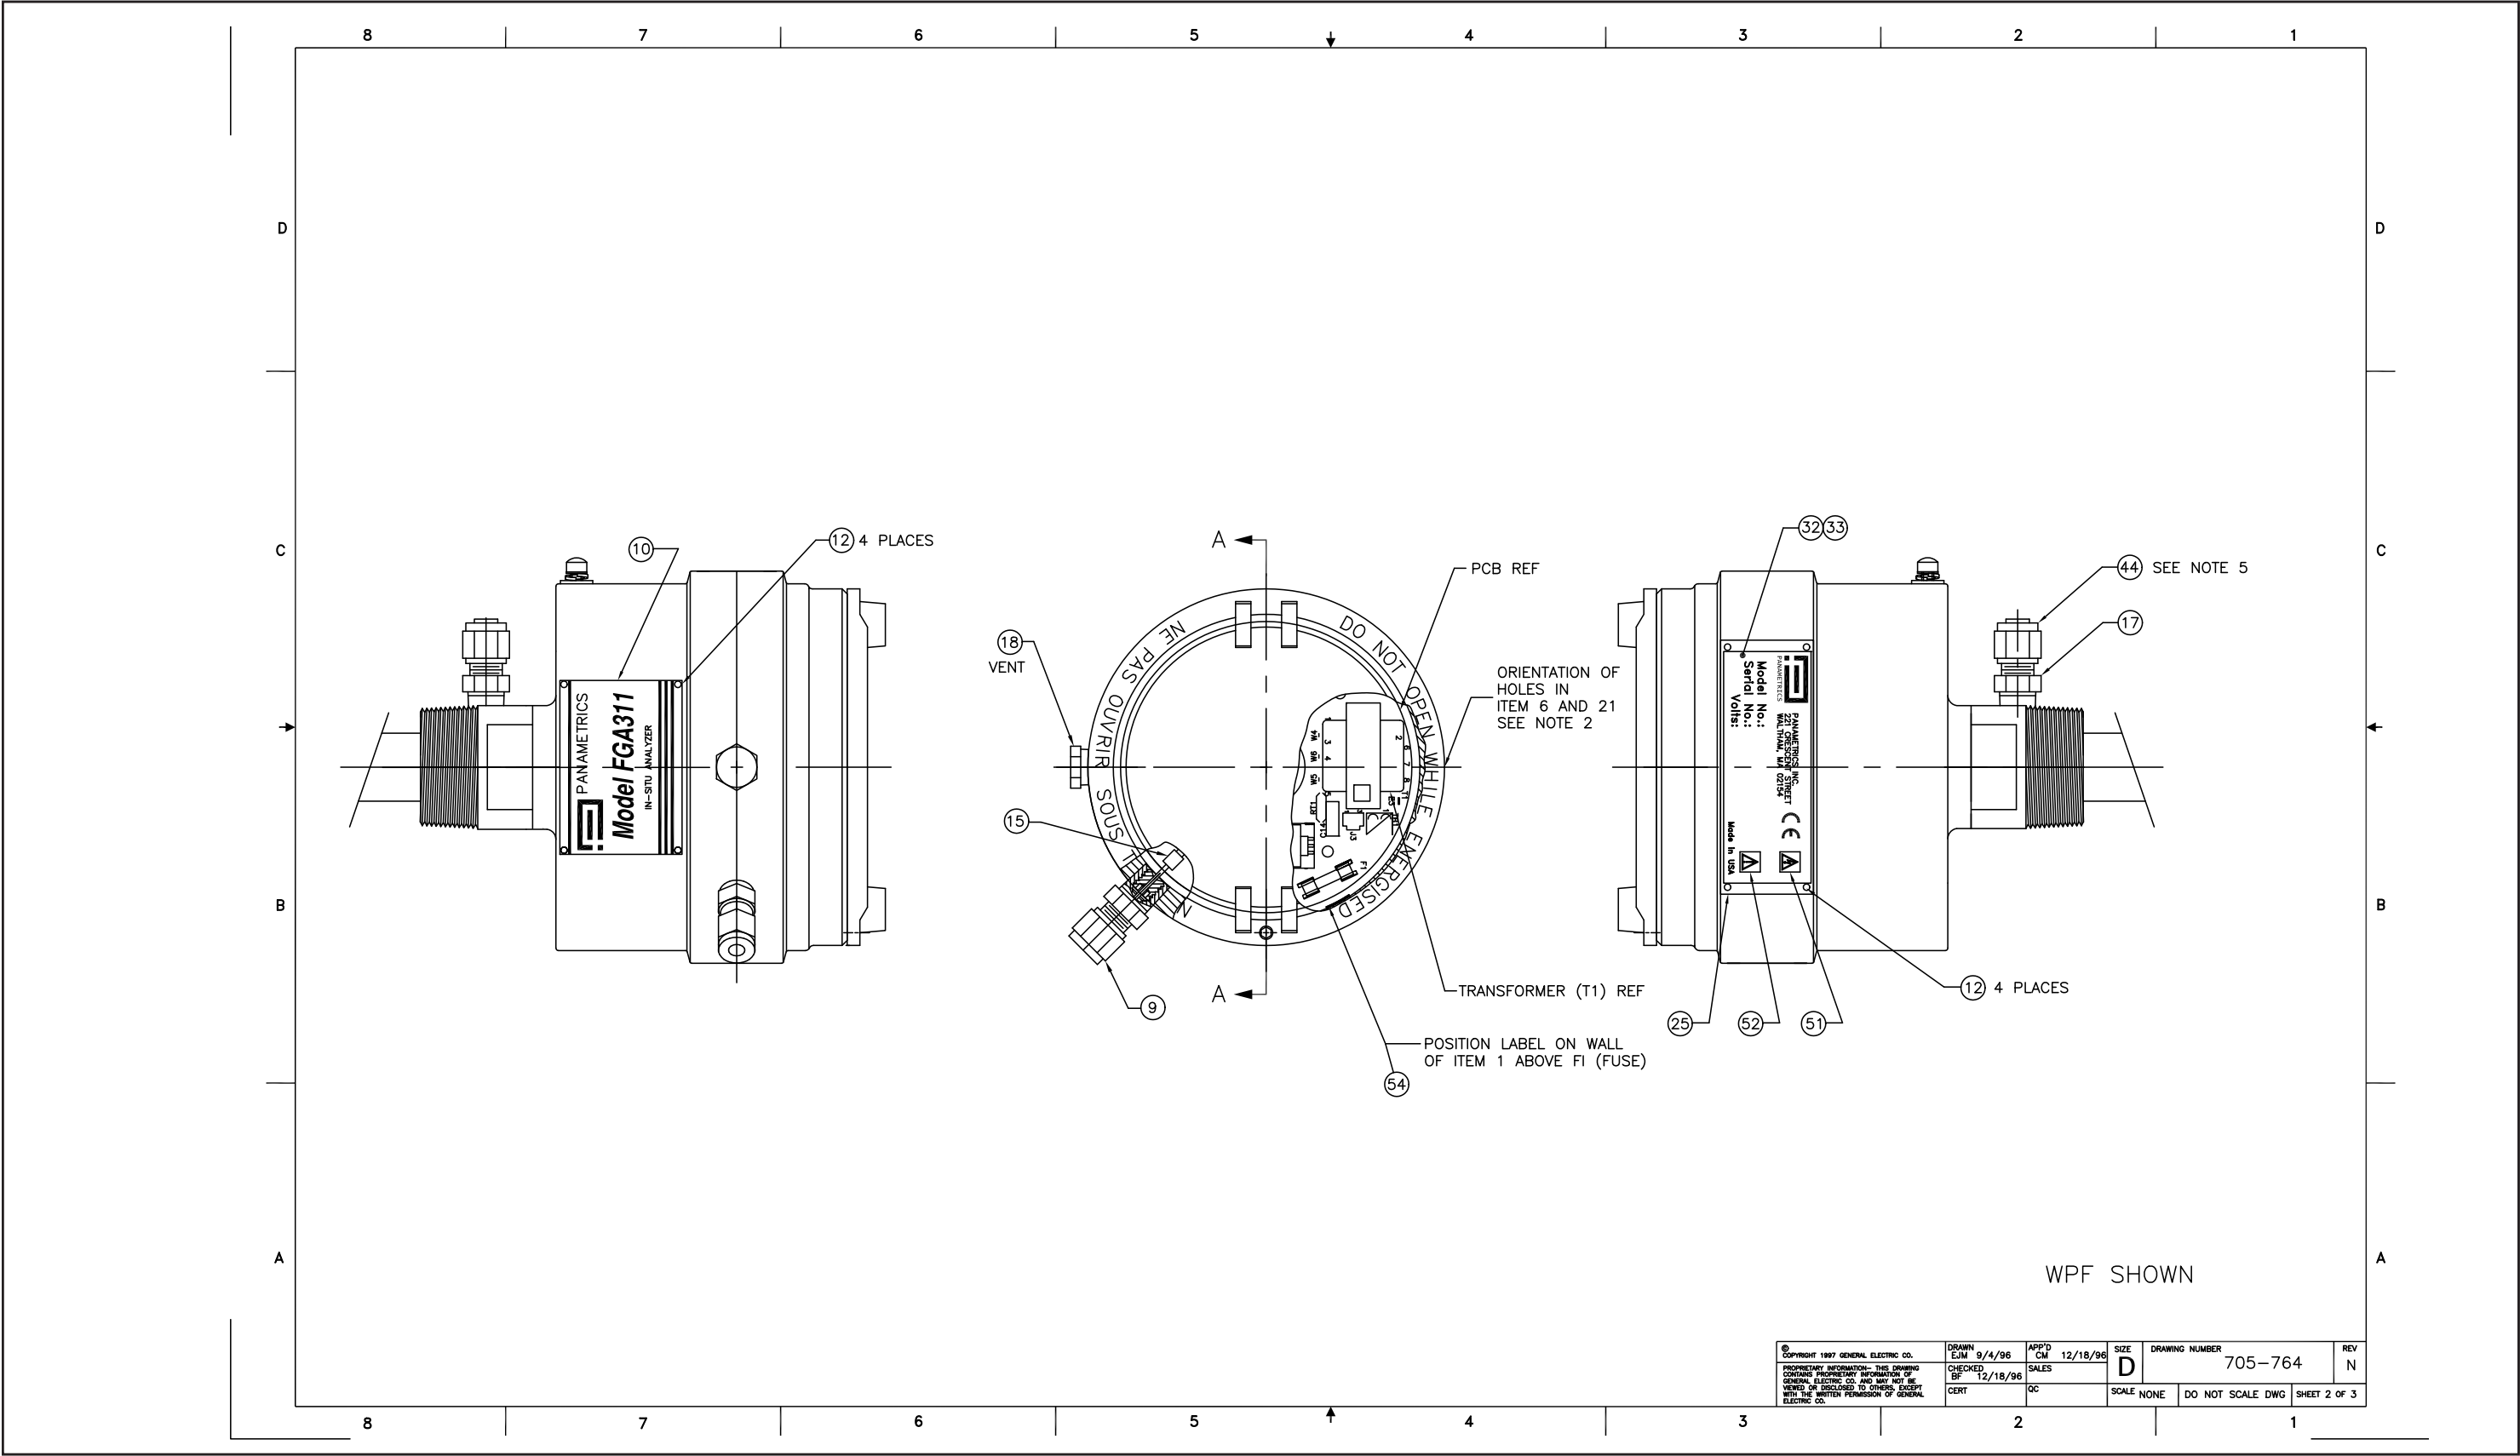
FGA 311 Weatherproof Assembly (Drawing 705-764_rev N, Sheet 2)
